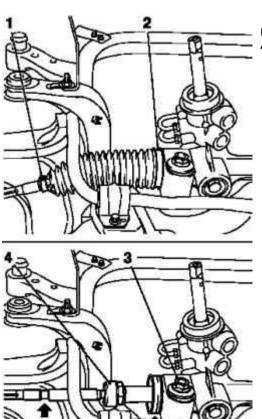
Removing the steering rods: 1, 2 - Fixing brackets, 3 - nut, 4 - tie rod ends
